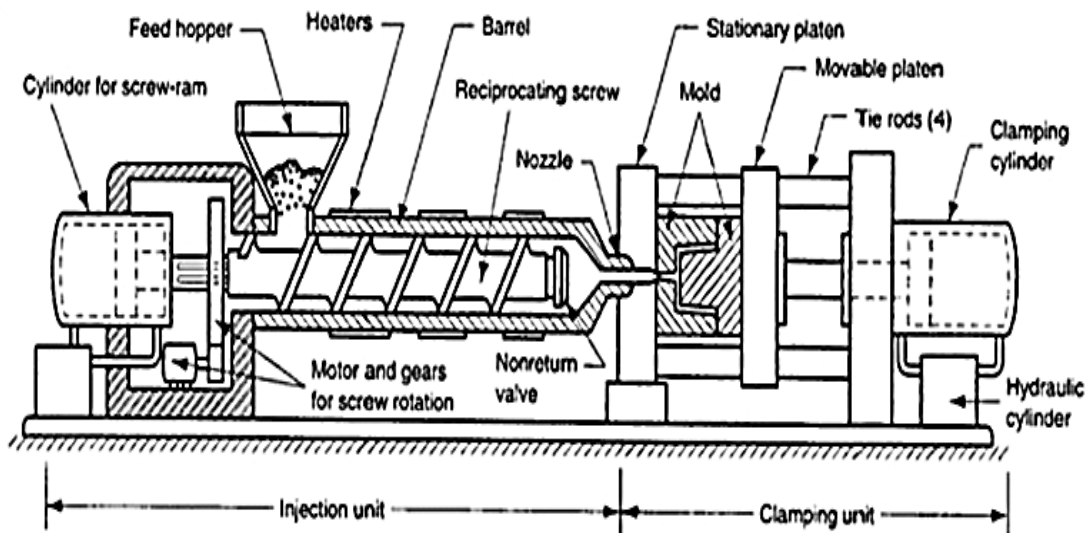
A typical reciprocating screw injection moulding machine. Source: (Sinotech 2013)
